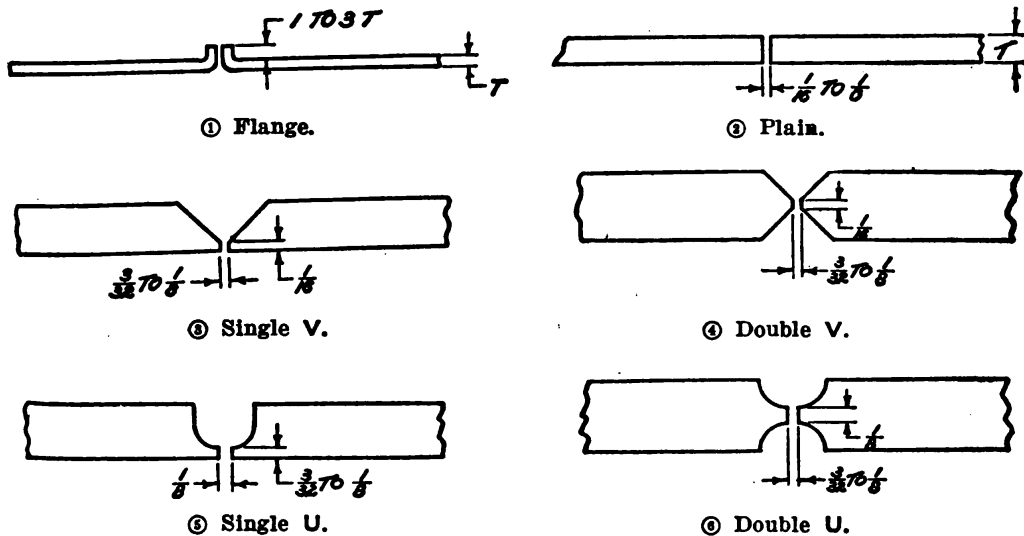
Preparation of metals for welding butt joints.
